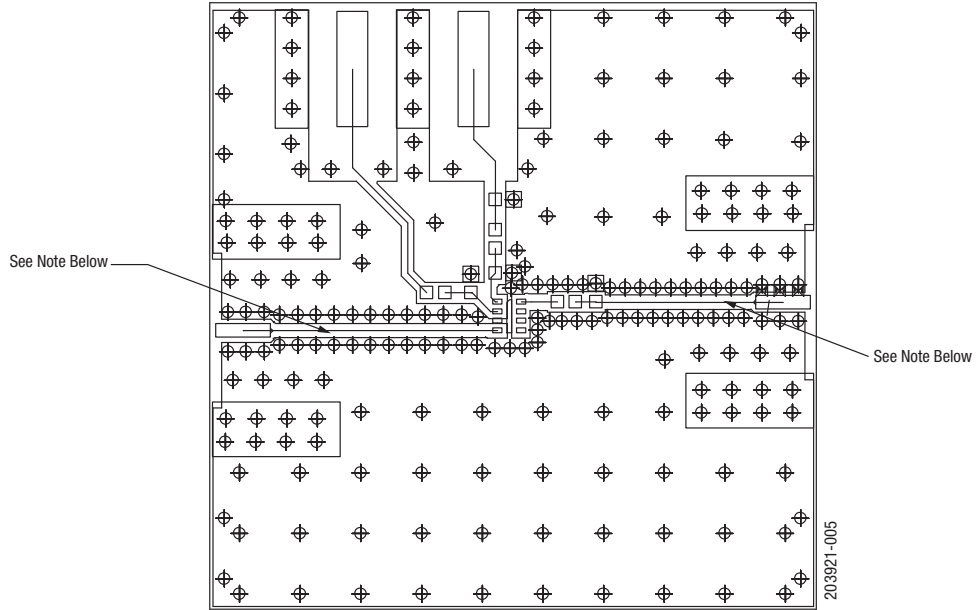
SKY65723-11 Evaluation Board Assembly Diagram
